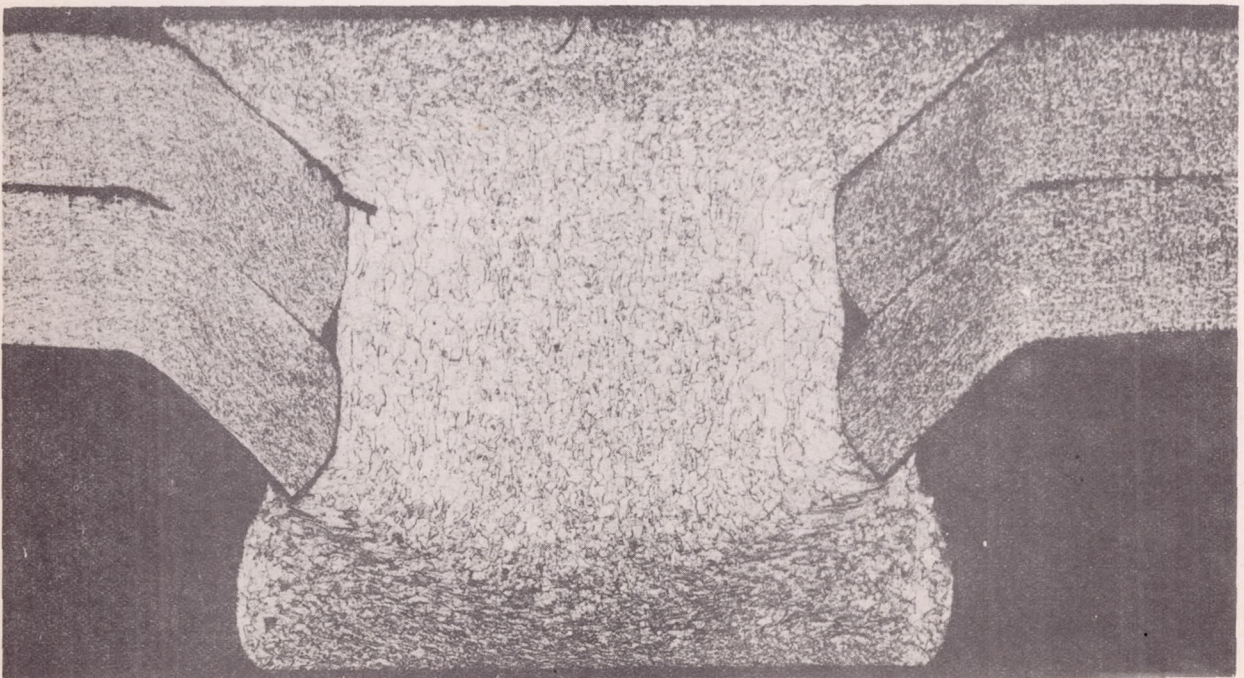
Set of dimples produced with 5000-pound pressure in 0.040-inch 24S-T sheet drilled with an 0.1065-inch diameter No. 36 drill. This photograph does not show radial cracks that formed at edge of hole. Magnified 20 times.
